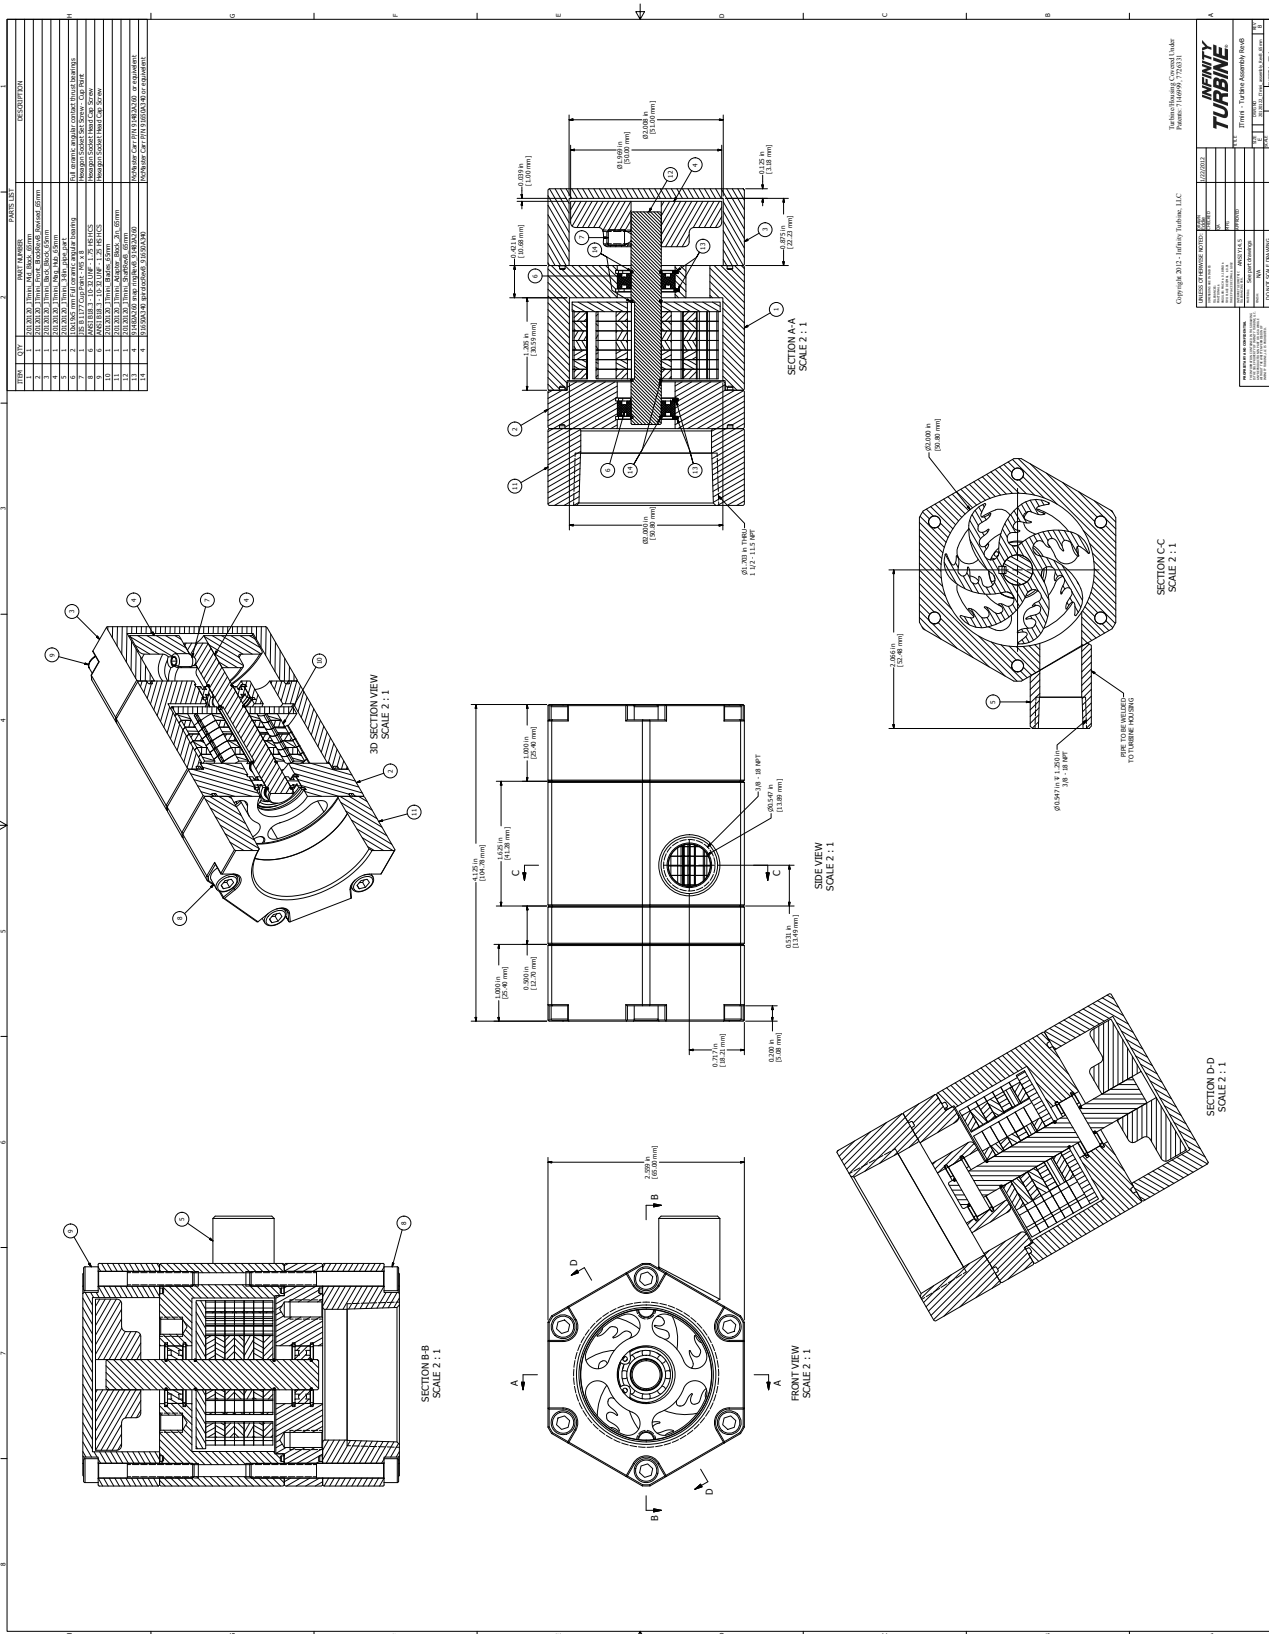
ITmini experimental turbine kit assembly plans (Infinity Turbine LLC, 2012)
